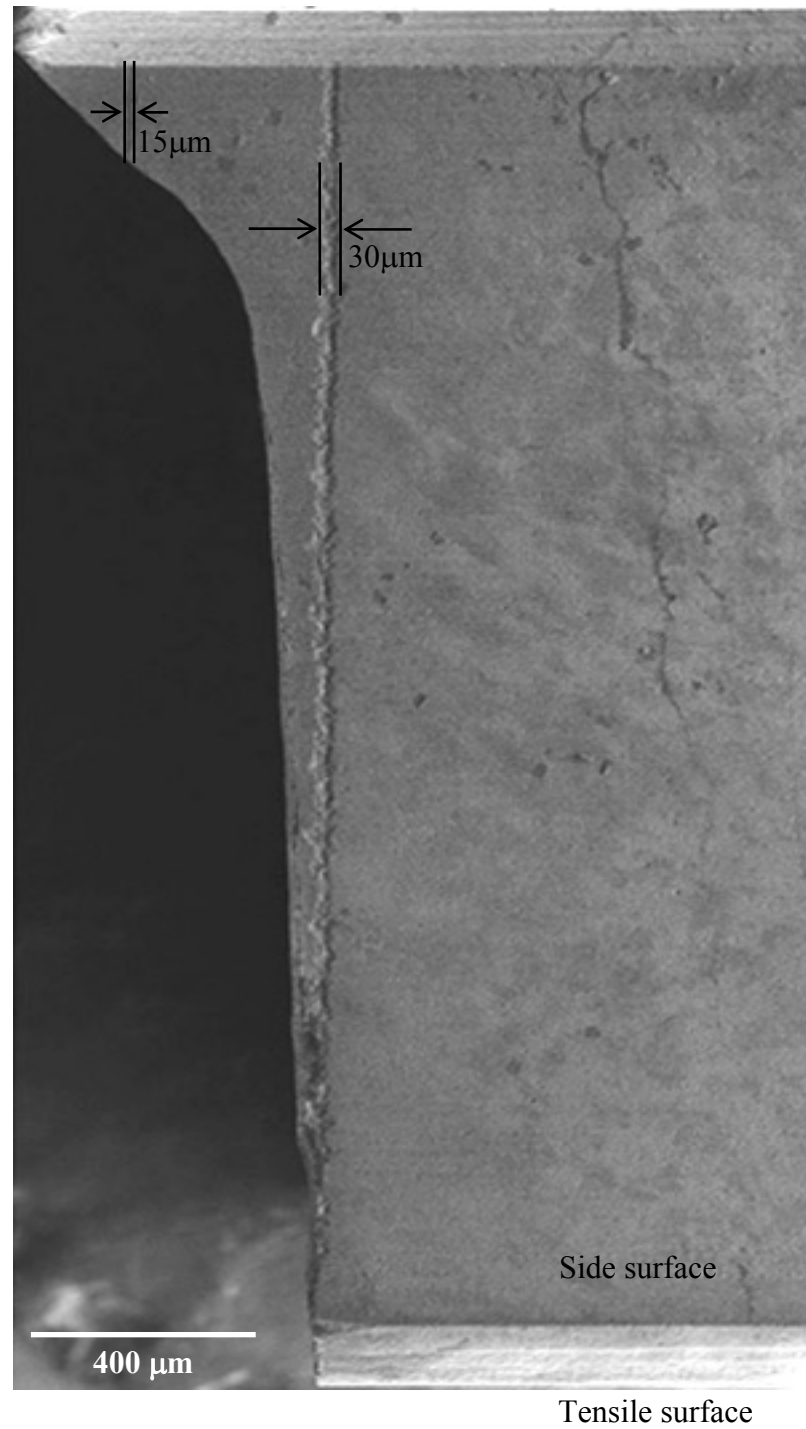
Bar A. Side surface of a low strength bend bar ($\sigma_f = 155$ MPa). Fracture is believed to have initiated at damage from deep machining scratches. Composite image. 200x magnification
